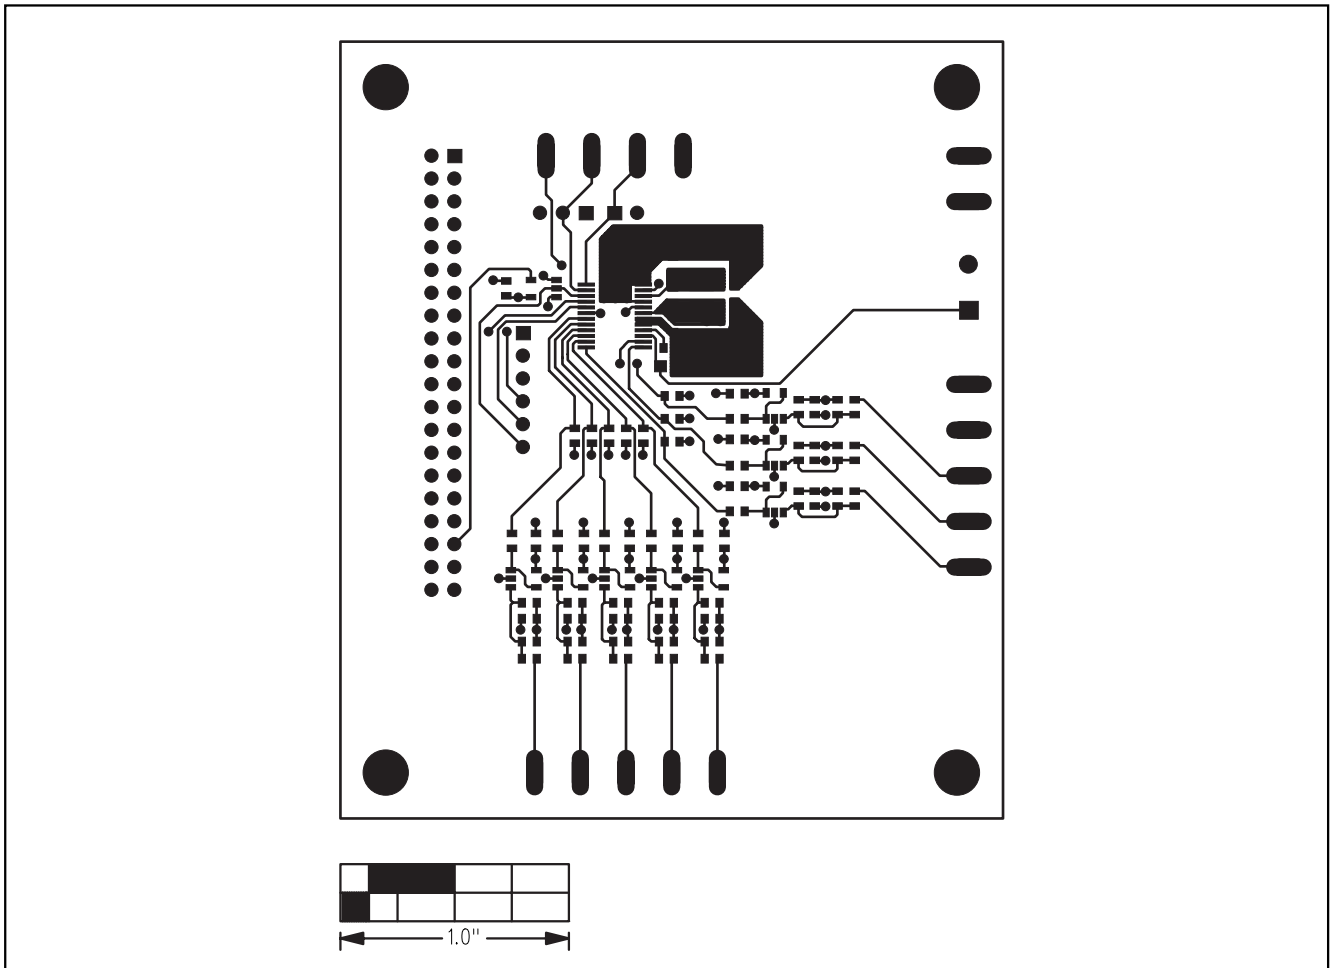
MAX1168 EV Kit PC Board Layout—Component Side
